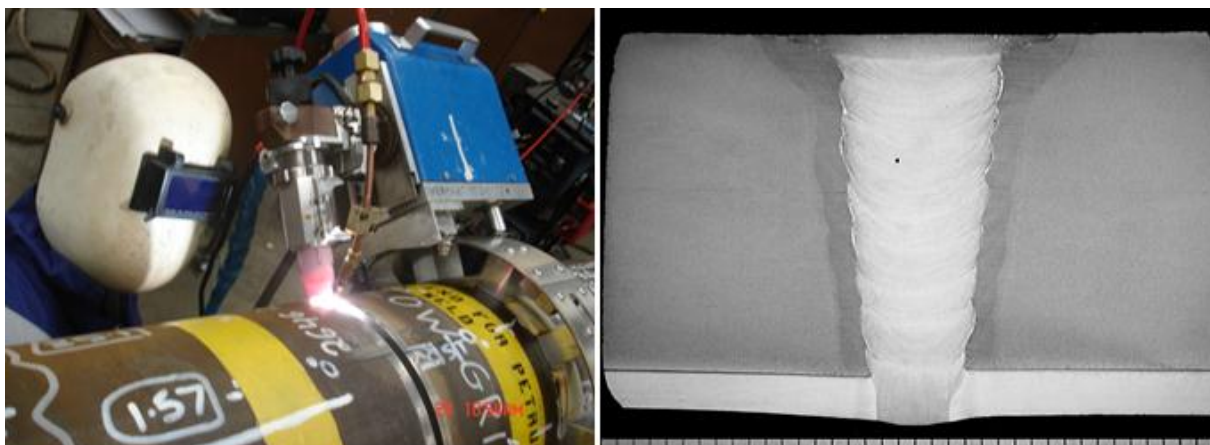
Mechanized PGTAW Equipment in Operation and Weld Cap Macro Section (Karunakaran et al., 2013)
